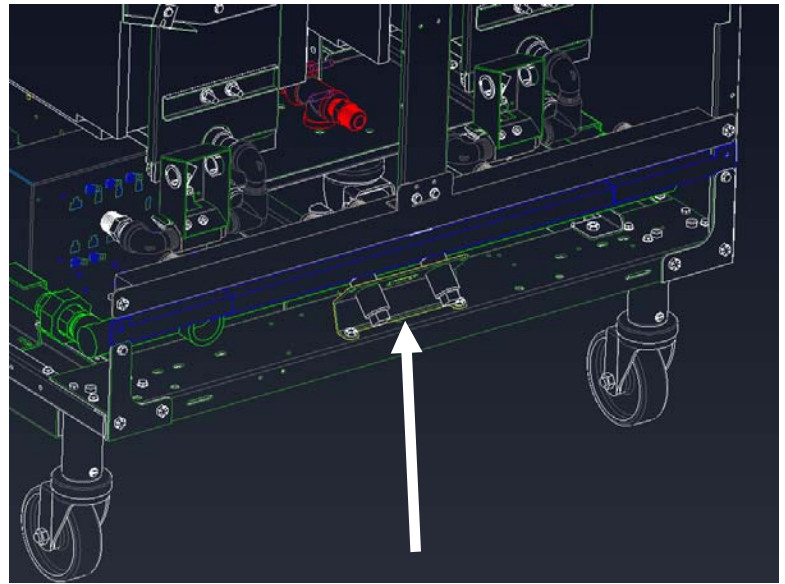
Attach waste oil connection assembly to rear channel as shown with provided 1/4-20 bolts.
